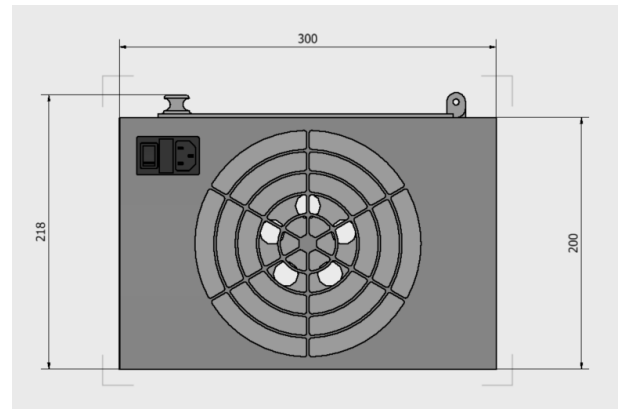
General dimensions of the proposed ozone cleaning device - front view
